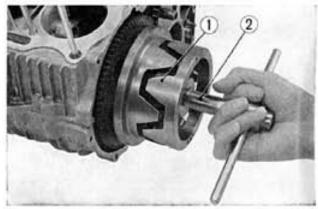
① A.C generator rotor ② Rotor puller
